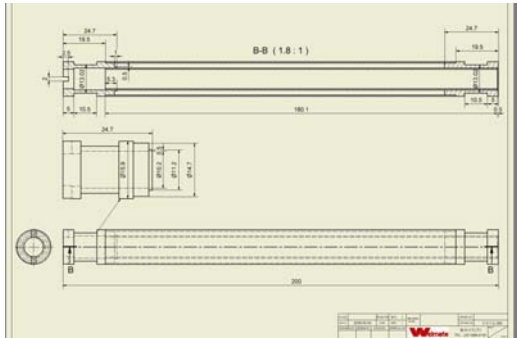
Geometry of SUS 316 weld specimen.
